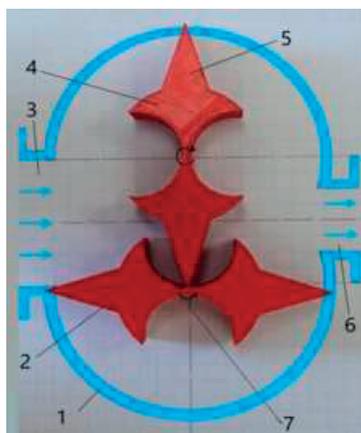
Cross section through the demonstration model of the rotating machine with two profiled rotors:
